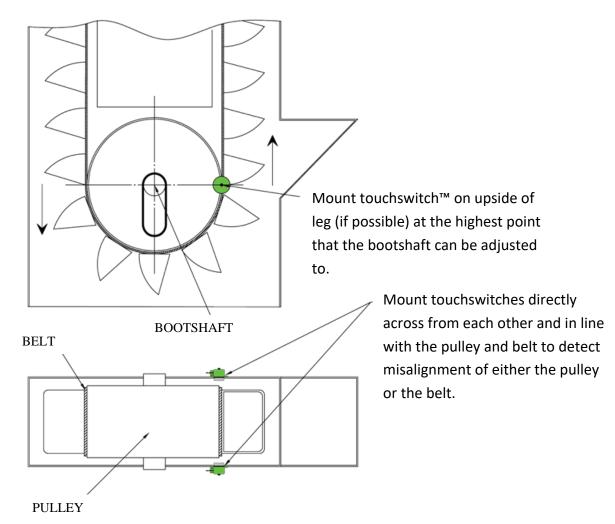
Touchswitch Mounting Position – Bottom Pulley
